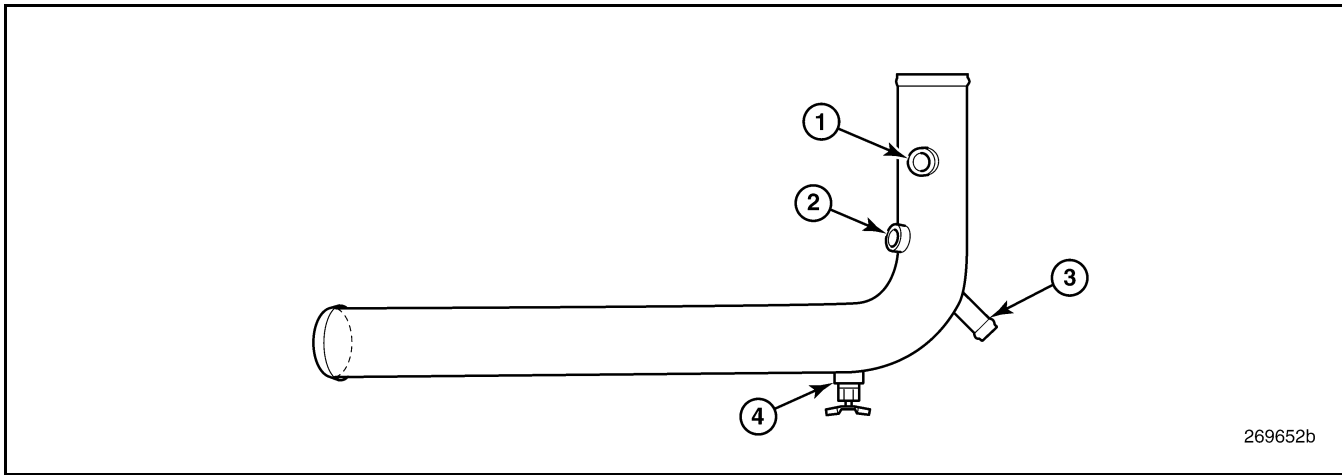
Radiator Lower Tube with Welded Bosses (Spuds) for Heater Hose Connections
